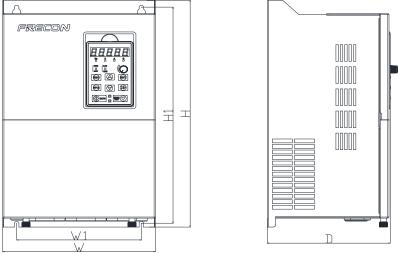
(b) 0.7~2.2kW Wall installation diagram (scheme Two)
